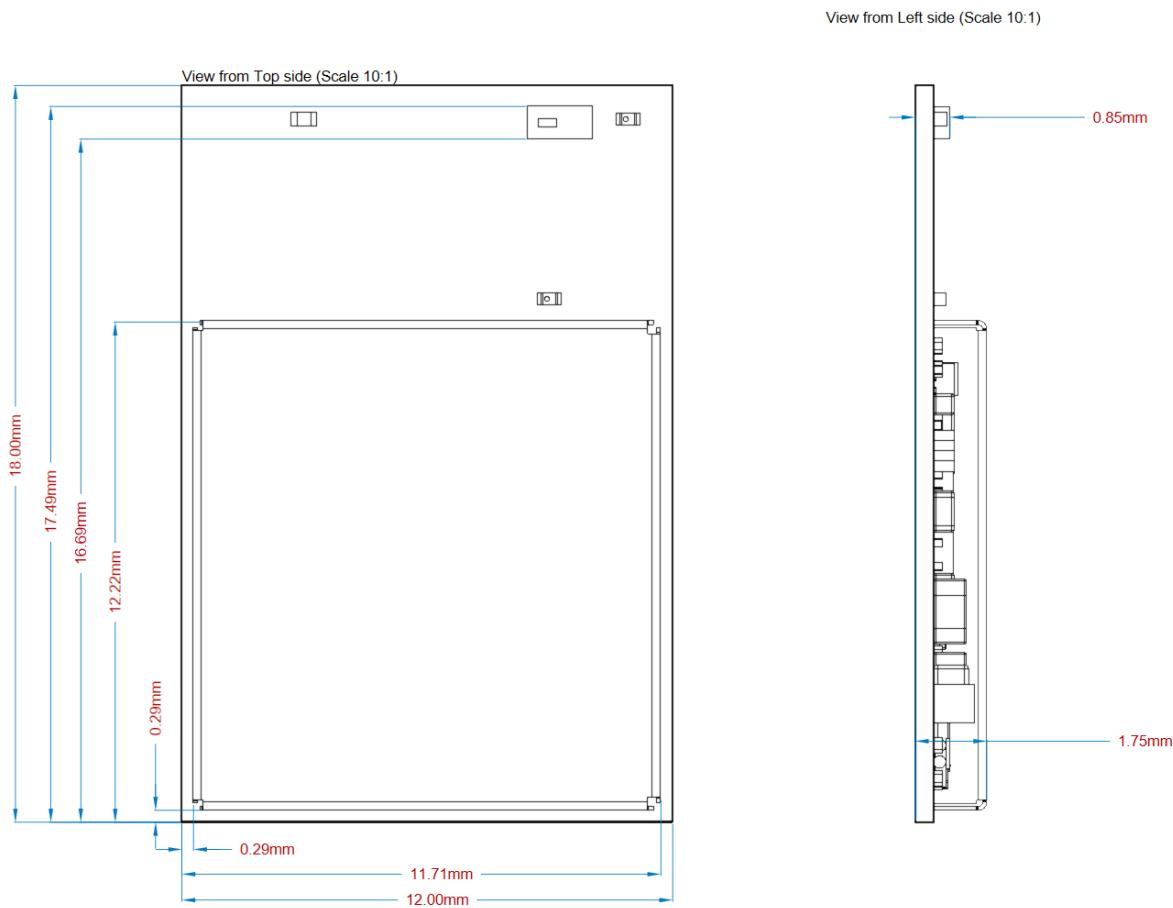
Mechanical Drawing - NX611 M.2 1218 Chip Antenna module.
